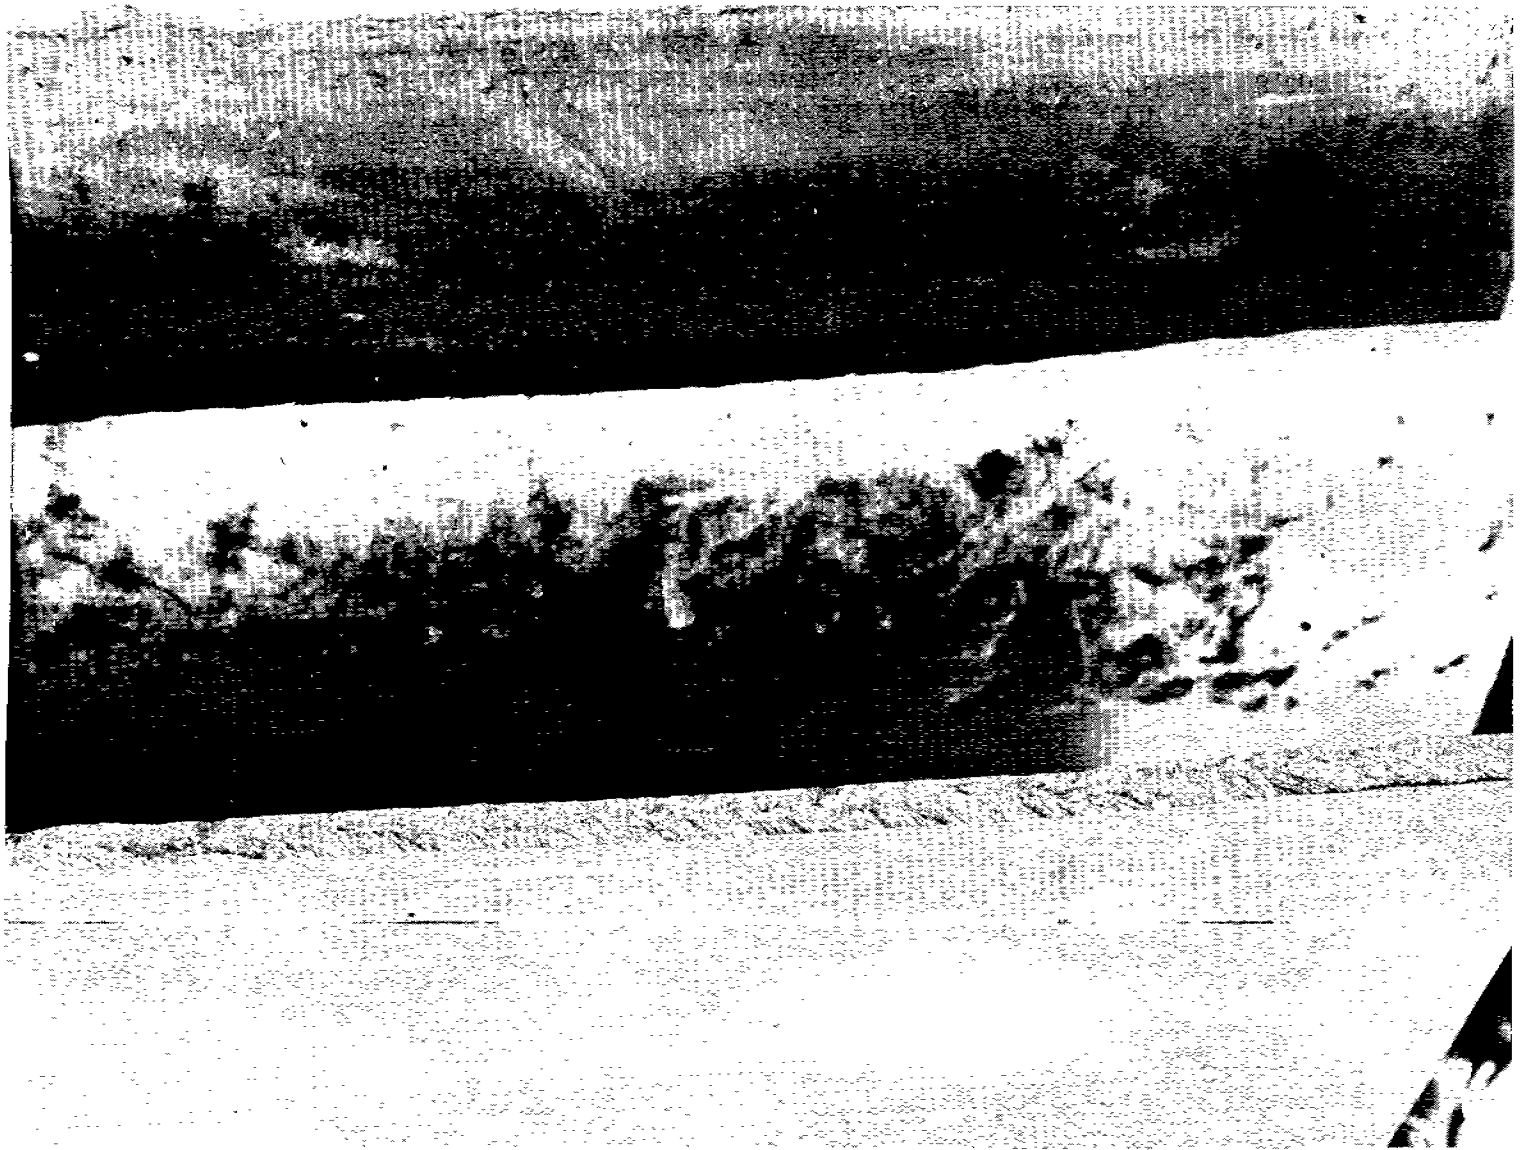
Appearance Of A Typical Fracture Surface - Test A3; Configuration: Central Slot With Brittle Weld Bead, Each End; Test Temperature: +10°F; Fracture Stress: 28,900 Psi On The Gross Section, 43,400 Avg. On The Net.
